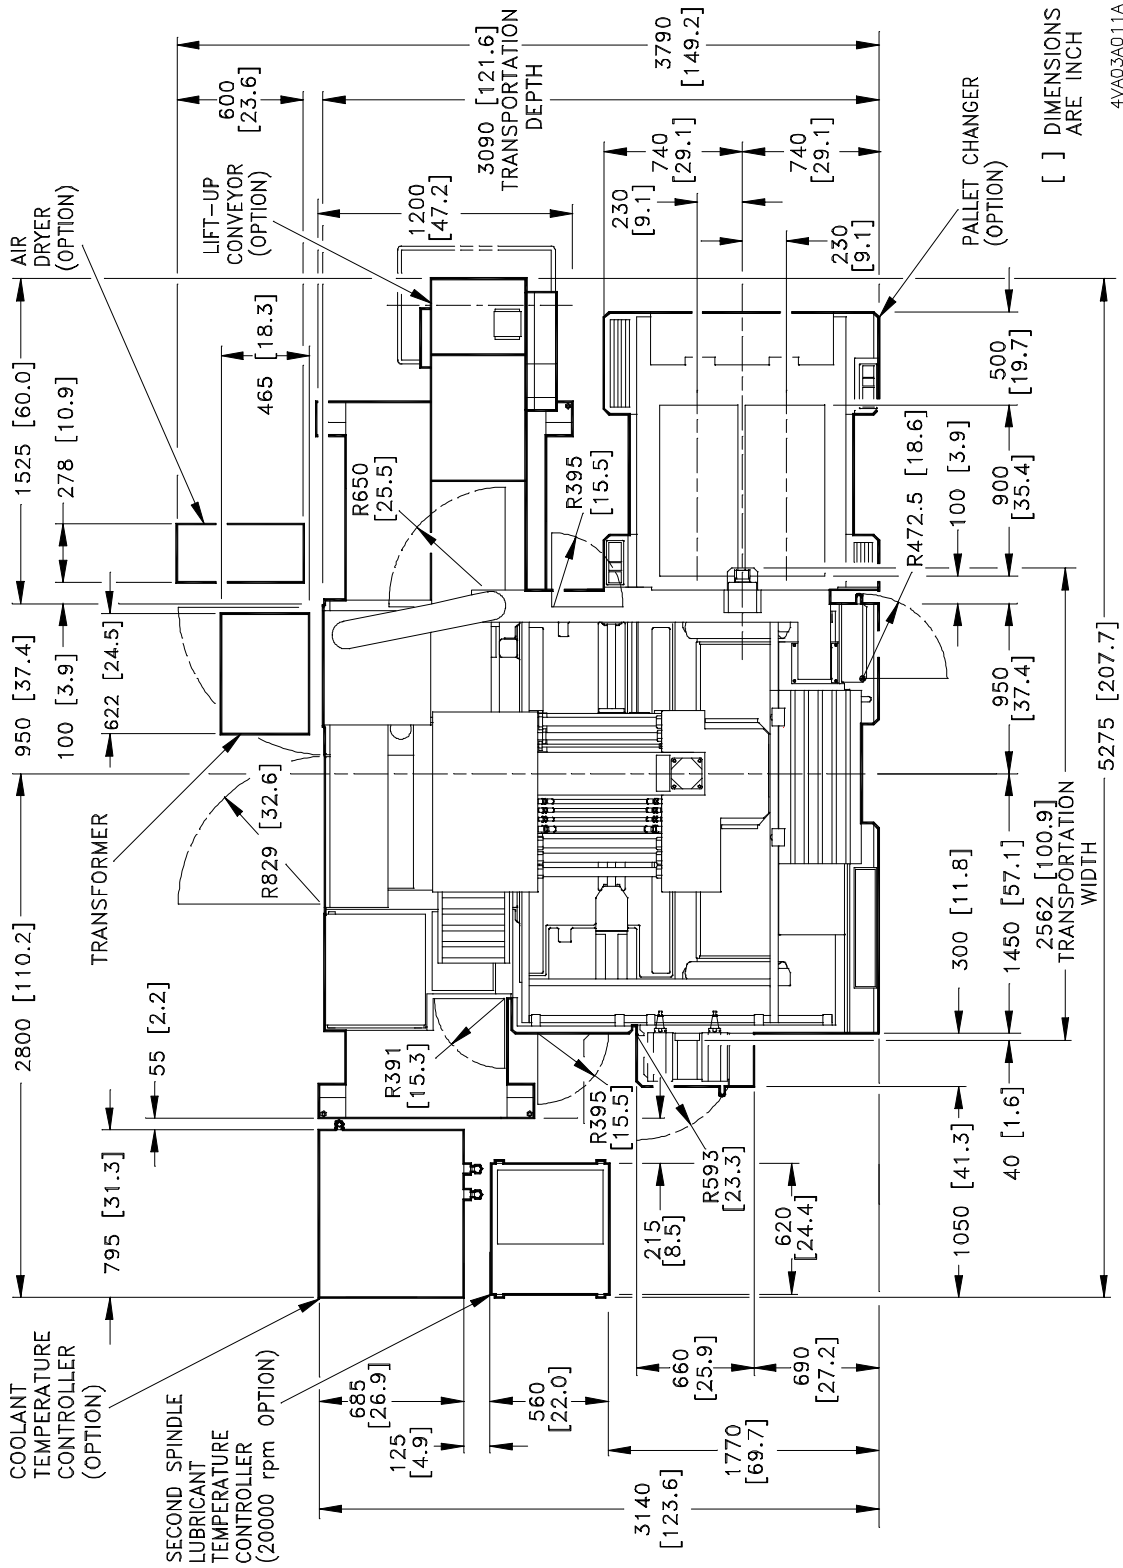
V55 WITH 40 OR 80-TOOL ATC, LIFT-UP CHIP CONVEYOR (RIGHT), AND APC
